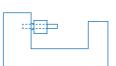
The extra large through hole allows processing of raw material with a large diameter using partly hollow clamping...
